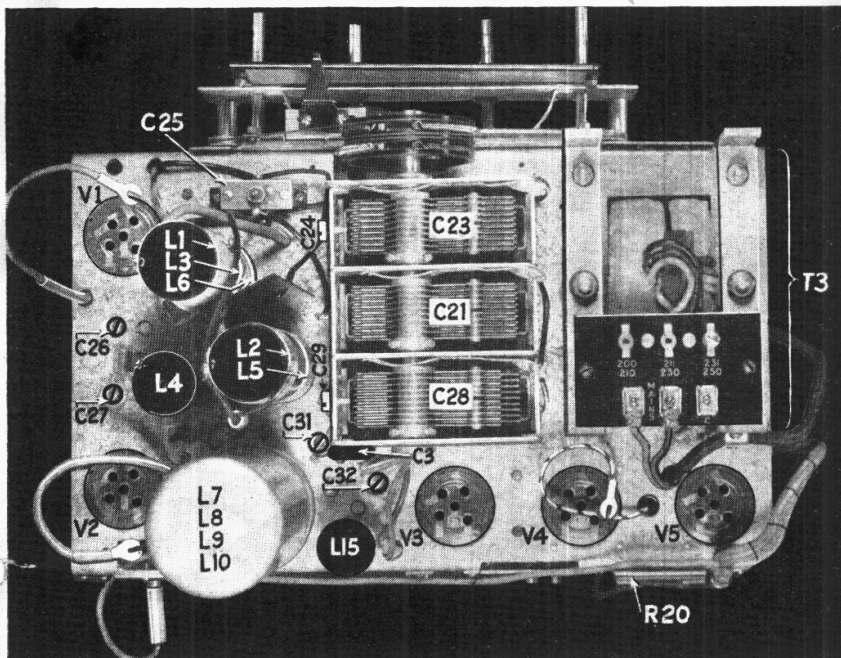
Plan view of chassis. The valves have been removed. The shielding can containing L7, L8, L9 and L10 can be unscrewed.
